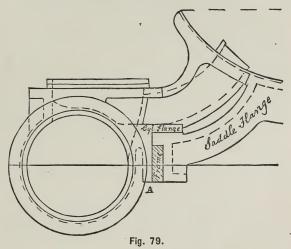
is a horizontal section of a locomotive cylinder, showing the steam-inlet, port, exhaust, and other details. Fig. 79 is an end elevation, with the cylinder-
